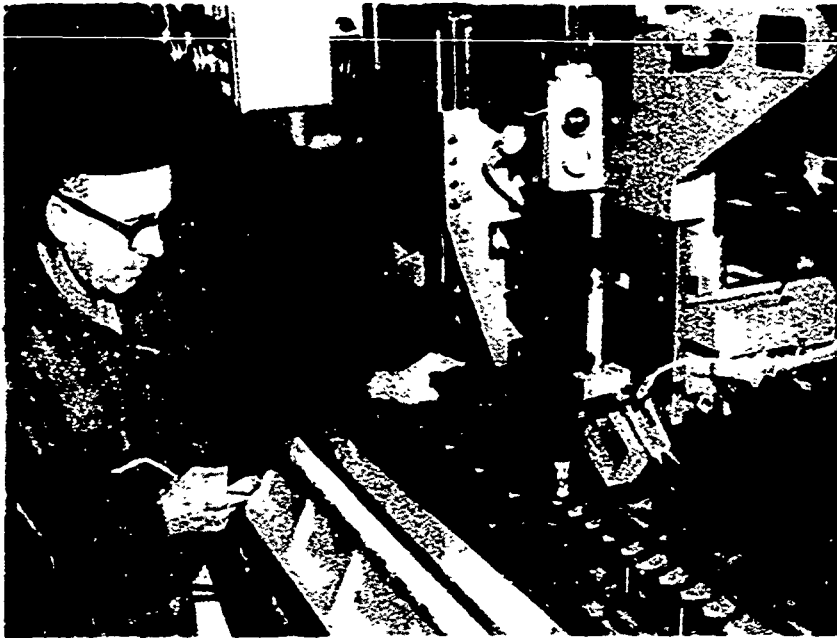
SINE-WAVE WELDING STATION AREA (REF. 54)
